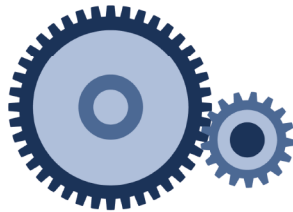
Spur gear with maximum 1 : 5 gear ratio
